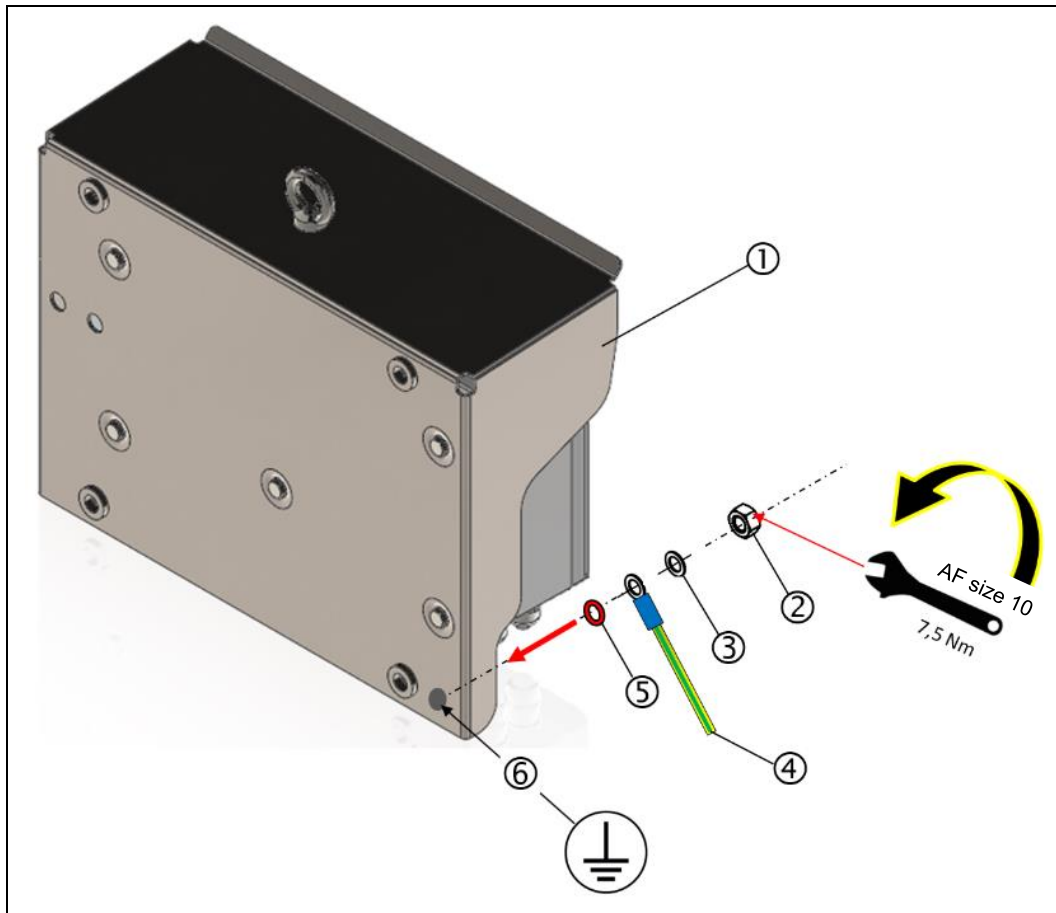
Installing the earth connection on the VN301<sup>plus</sup> central unit
